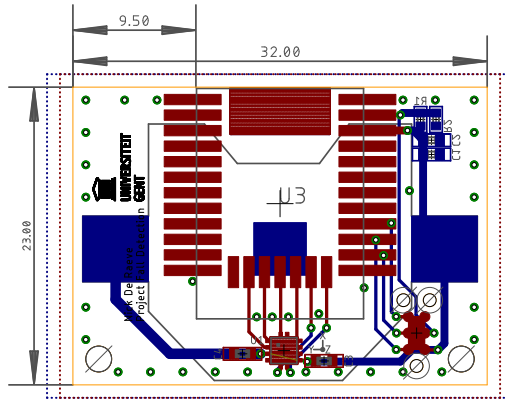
Designed Printed Circuit Board (PCB) (dimensions in mm)
